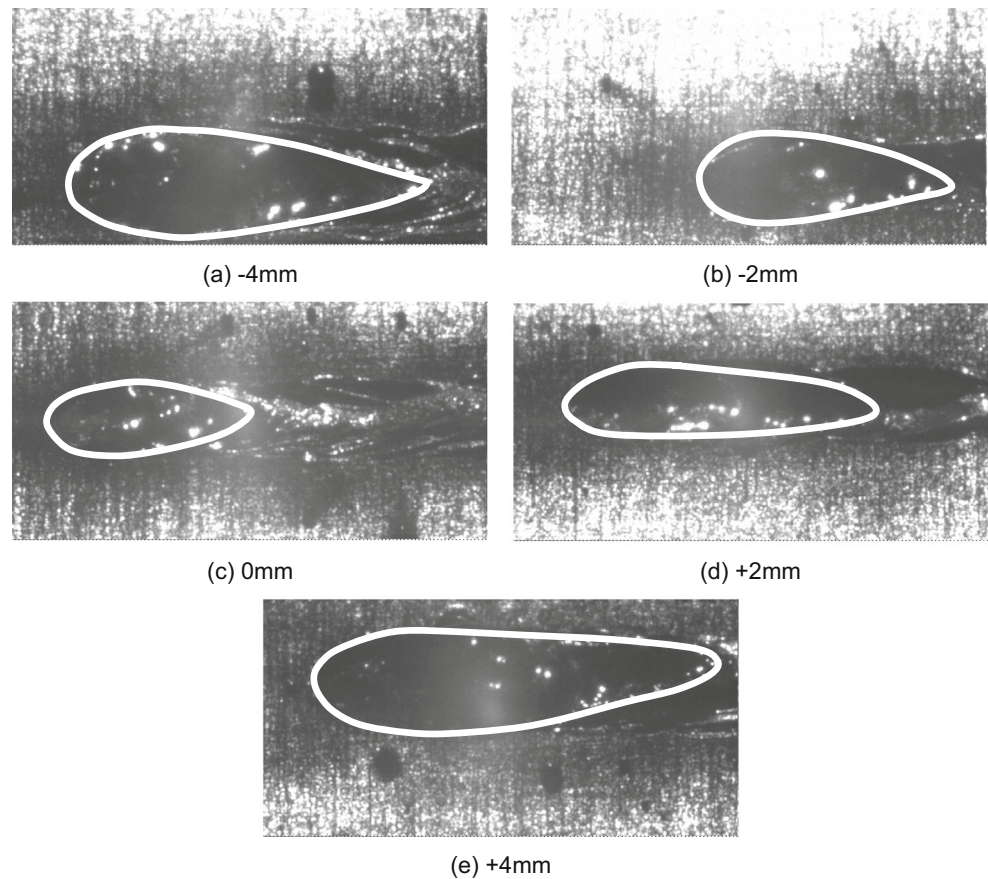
Weld pool morphologies produced for different focus positions (with a welding speed of 3.5 m/min and laser power of 5 kW)
